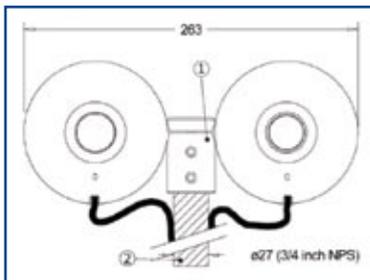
NR01 top view. Standard cable length is 5 m. Cable can be installed and replaced in-field by user. Easily attaches to 1" inch tube stock (2); mounting tube not included. All dimensions in mm.
